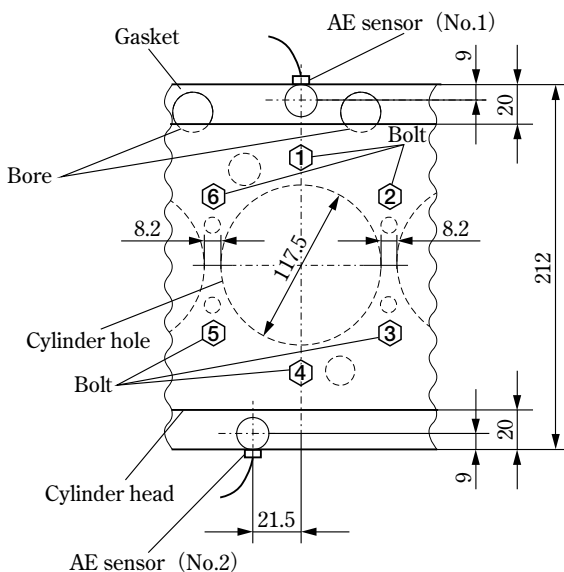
Location of the bolts mounting the gasket and the AE sensors
